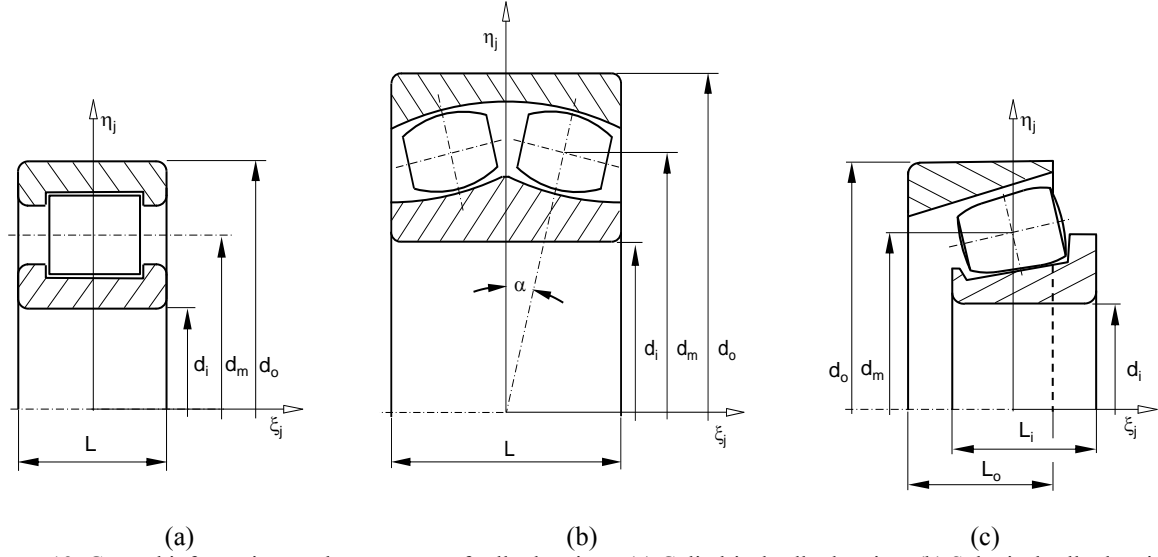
General information on the geometry of roller bearings. (a) Cylindrical roller bearing; (b) Spherical roller bearing; (c) Tapered roller bearing.
